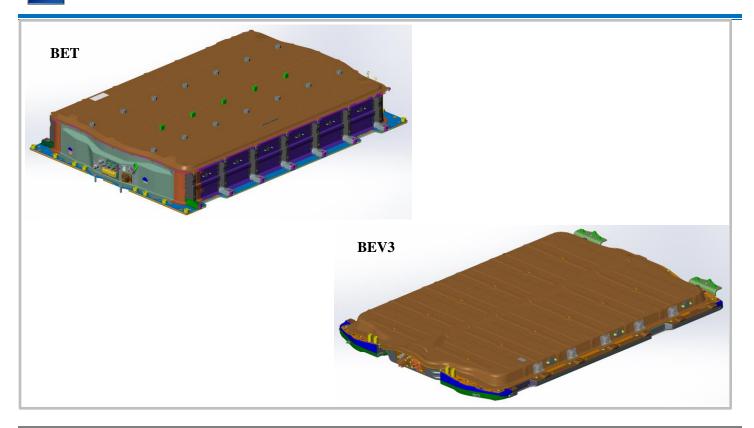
BET and BEV3 Battery Assembly with Cover
